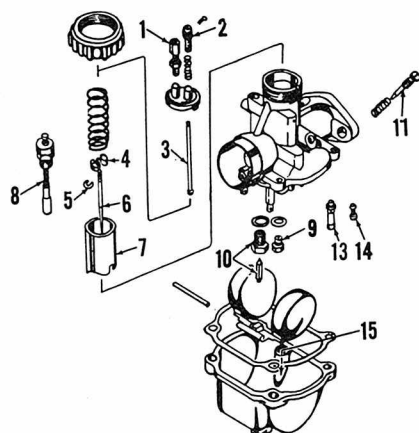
Exploded view of typical Mikuni VM carburetor.
